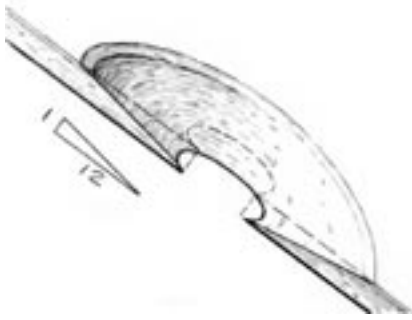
Grind a minimum 12-to-1 bevel around the edge of the excavated hole, whether the damage extends partially or completely through the skin.
